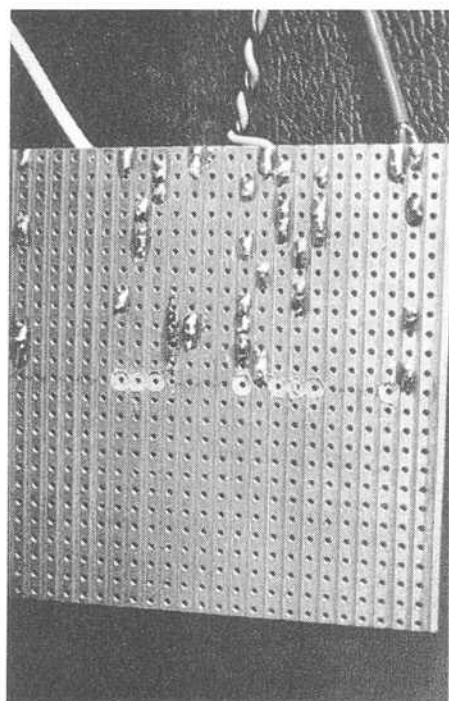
Underside view of the Veroboard circuit, showing the soldering and the breaks in the copper strips.
